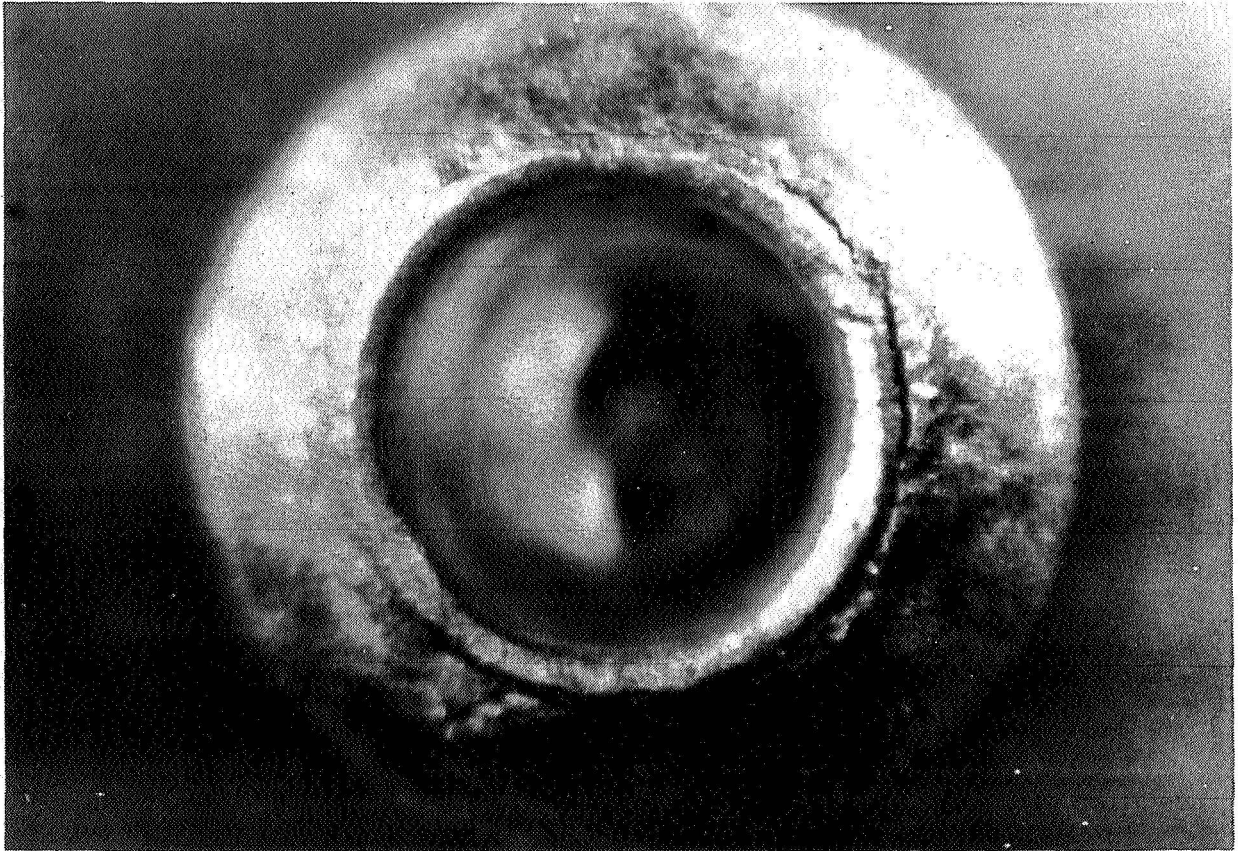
CRACKED SOLDER CONNECTION AFTER 500 CYCLES
